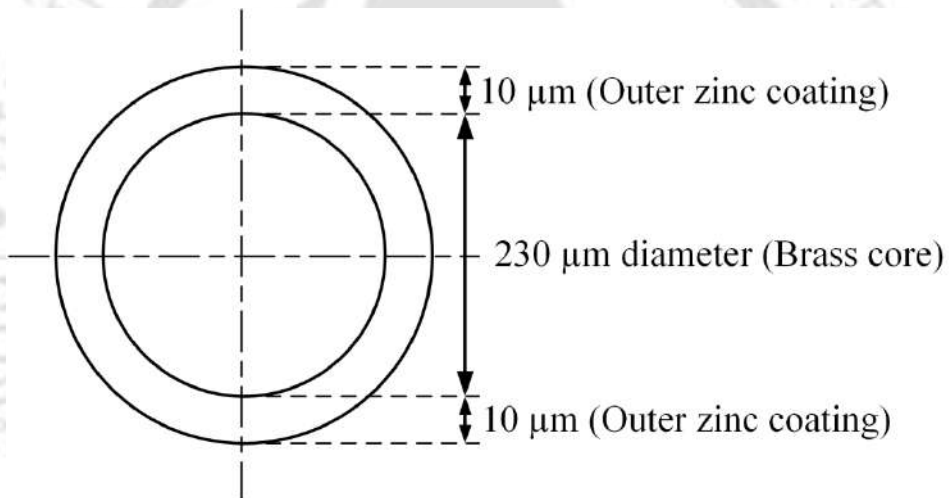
Cross-sectional view of the zinc coated brass wire model geometry
